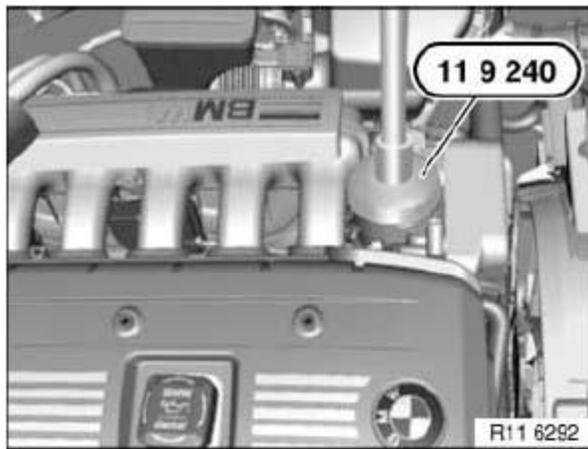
Removing Oil Filter Cap Using Special Tool (11 9 240)
